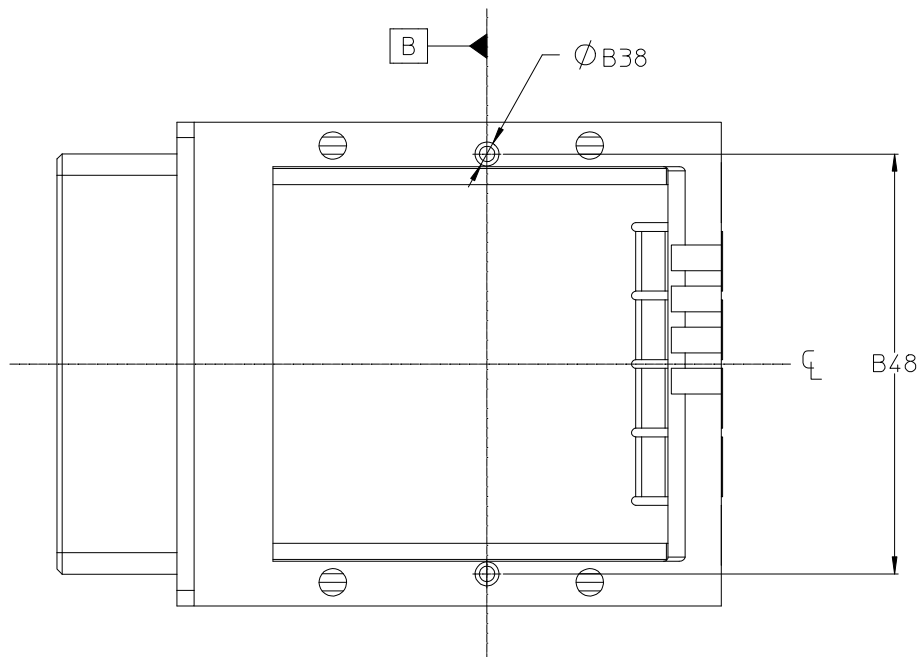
x4 EMI Guide Housing Assembly Bottom View
